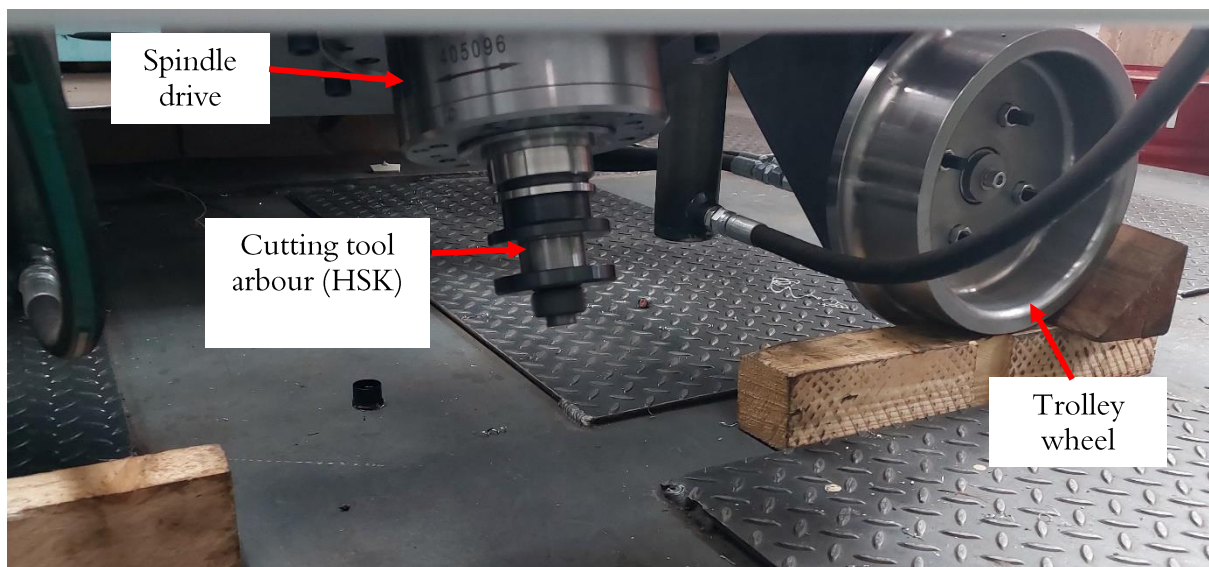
A close-up image of the spindle arbour and connected spindle drive
